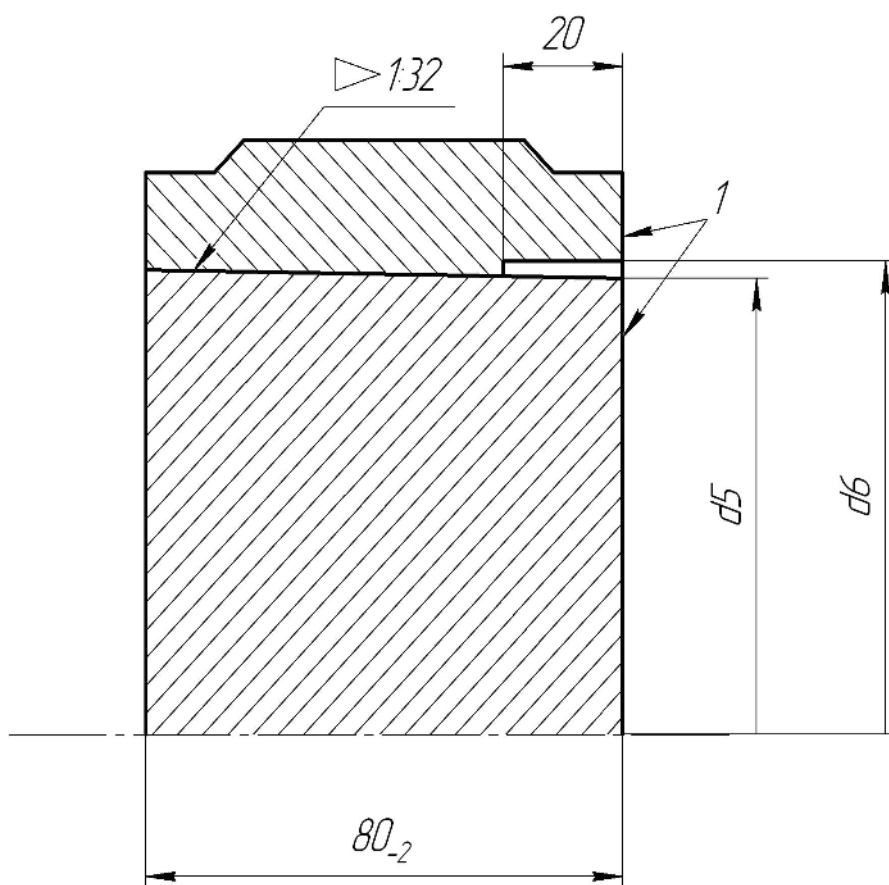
Ring gauge thread profile with R-N not perfect profile
